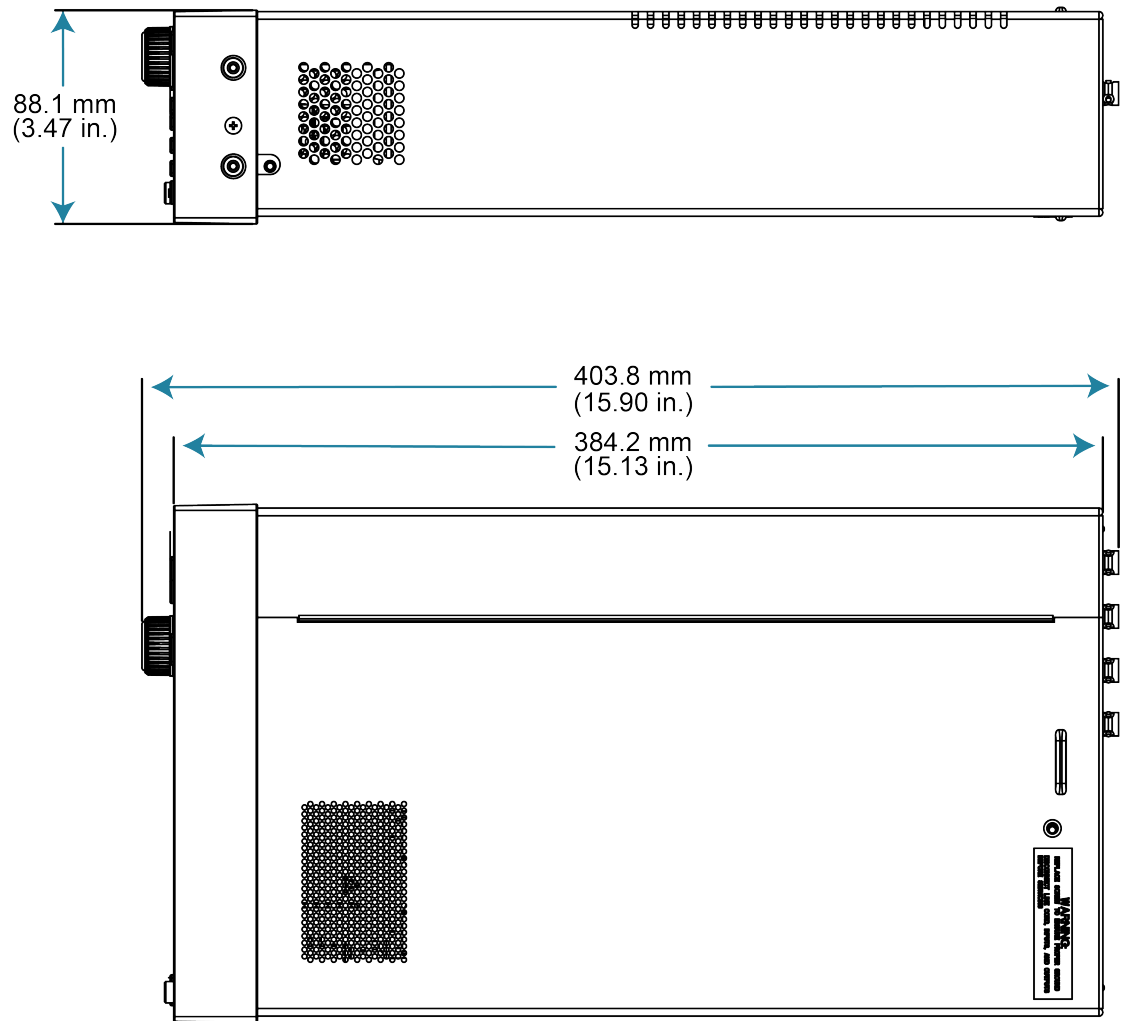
2470 top and side dimensions with handle and bumpers removed
